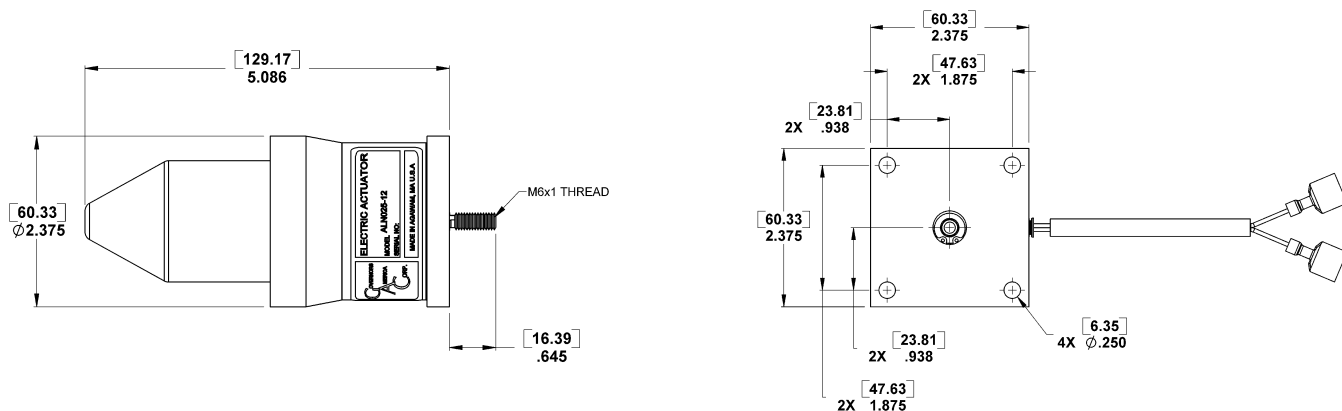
ALN025 Outline Dimensions in: inches, [mm]
